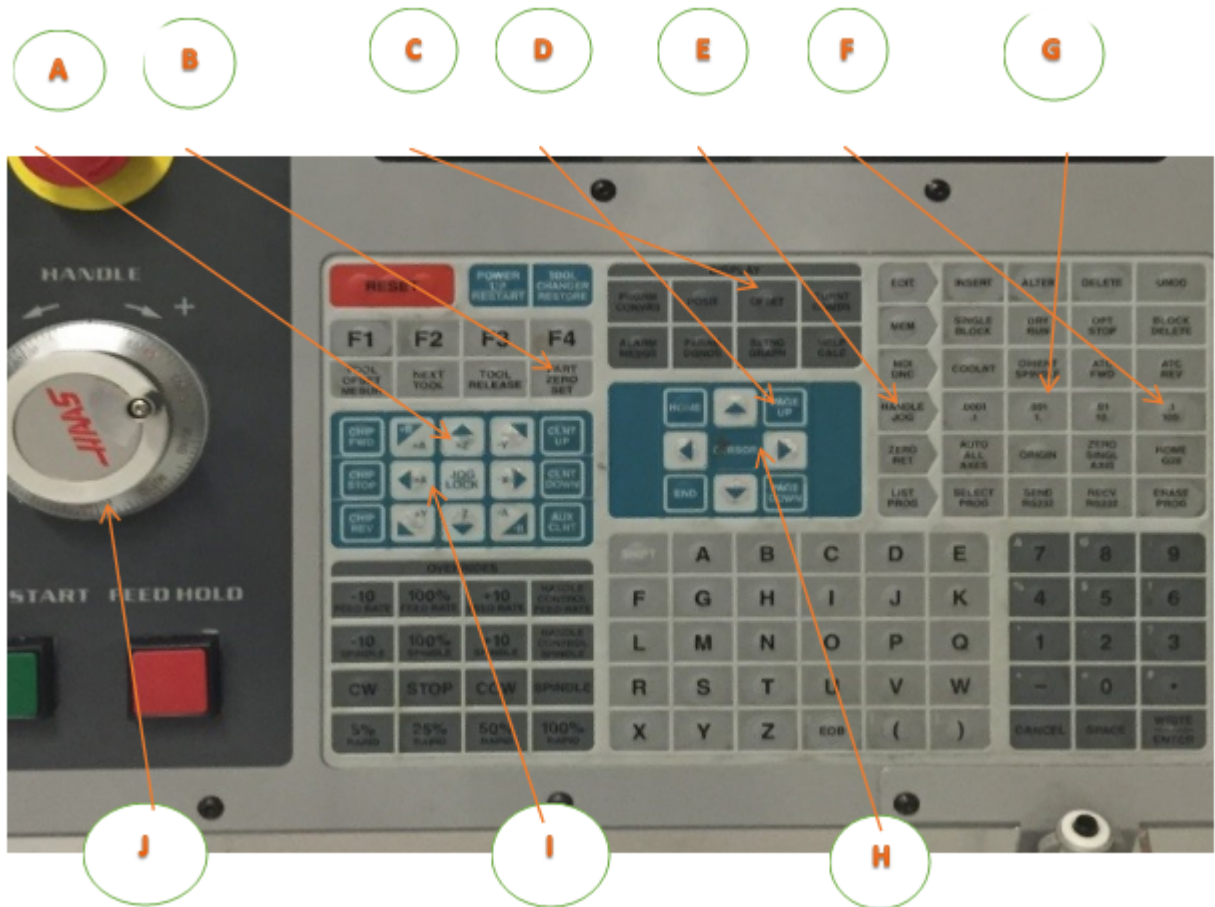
Setting Part Zero XY (Using Mechanical pointer)
